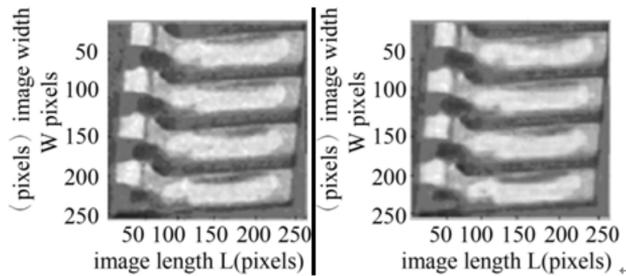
Denoising results of uncertainty workpiece solder joint image: left part–AWPWM (2 layers decomposition, 3×3), right part–AWPWM (2 layers decomposition, 5×5)
